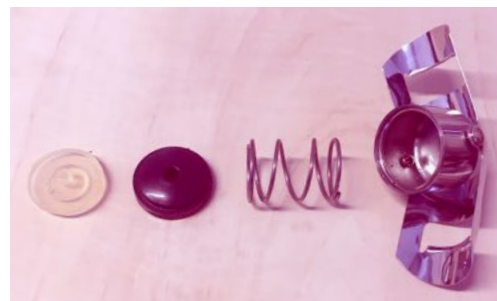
Lever-arm and spring mechanism in bottle stop
